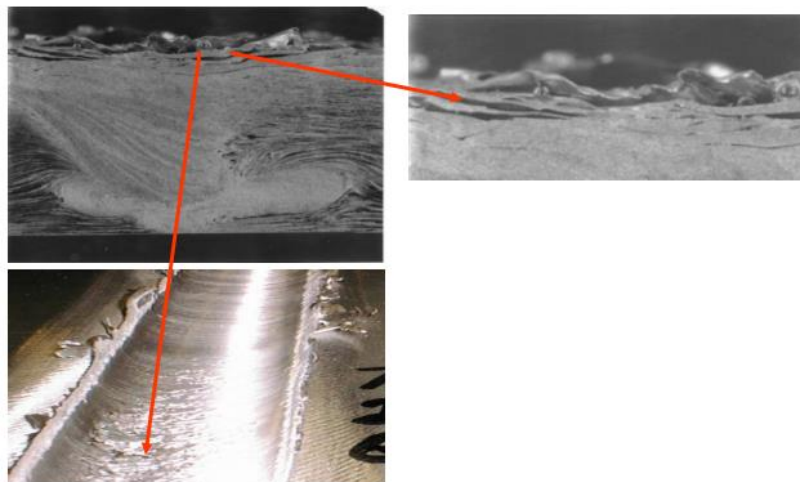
Example of Surface Galling caused by Tearing of Joint during Friction Stir Welding
